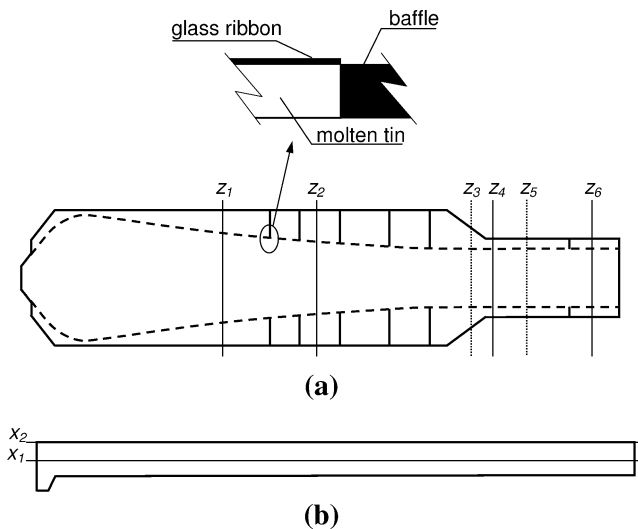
Geometry, baffles arrangement and bath sections used in the study: (a) horizontal view, and (b) vertical view.
